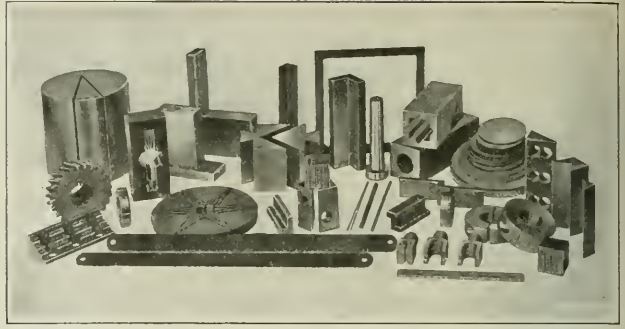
Typical Examples of Work cut on the Peerless Universal Shaping Saw
